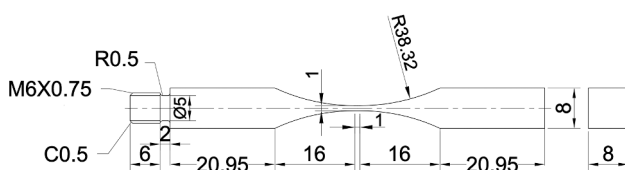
Shape and dimension (in mm) of the fatigue specimen.
